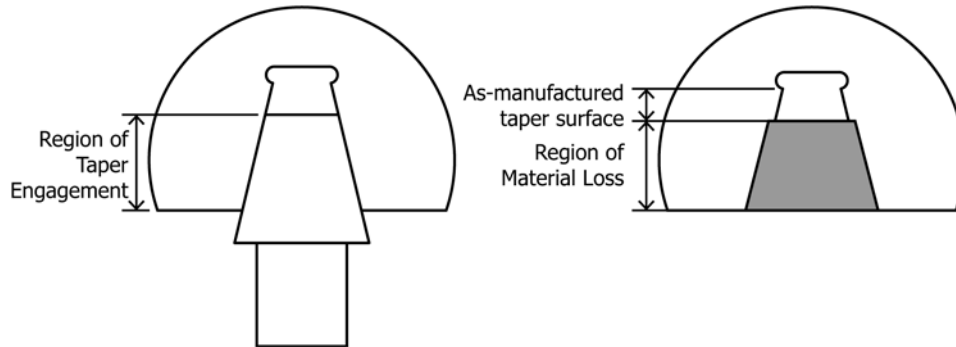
Schematic Diagram Showing Type 2 Pattern of Material Loss from the Head Bore Taper. The stem cone taper contact at one end of the head bore taper, leaving as-manufactured regions at only one end of the head bore taper (this may occur at the mouth or throat end of the taper).
